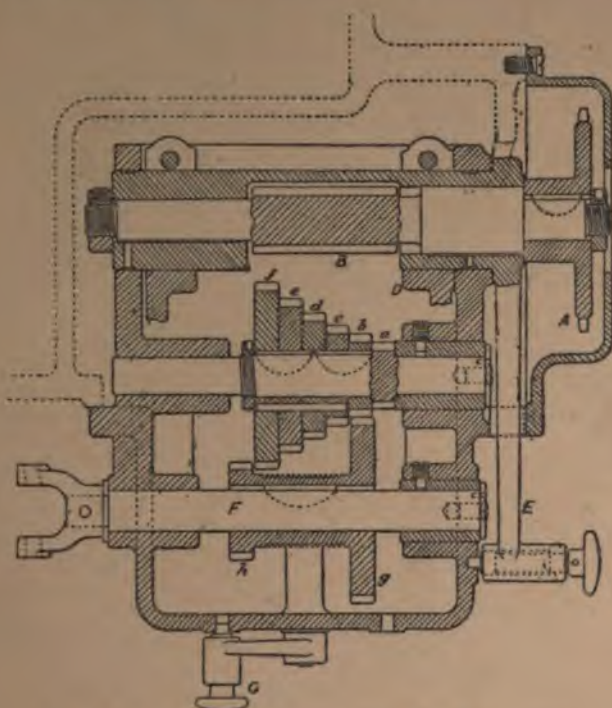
Section through Feed Gears, B. & S. Machine.
